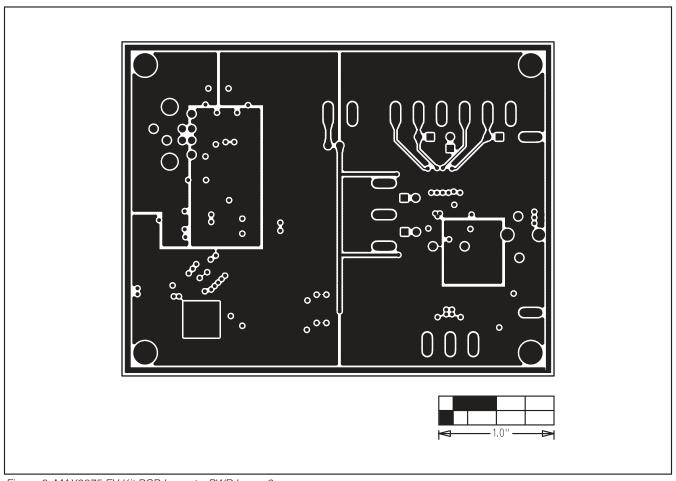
MAX9875 EV Kit PCB Layout—PWR Layer 3
